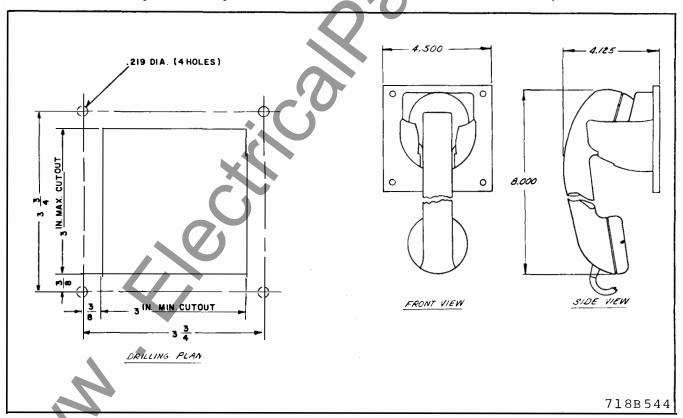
Mounting Dimensions for Panel Mounted Hookswitch- Handset Assembly
